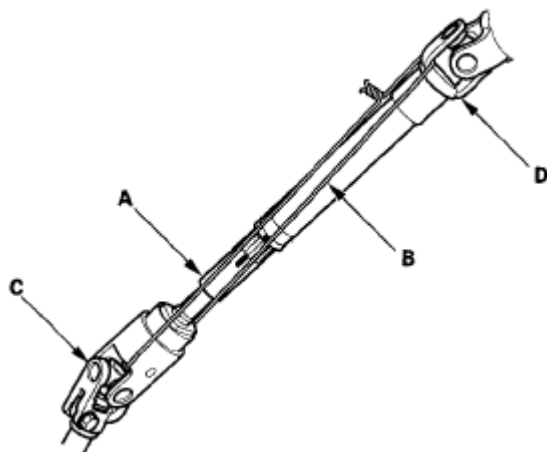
Identifying Lower Slide Shaft With Wire Between Joint Yokes
